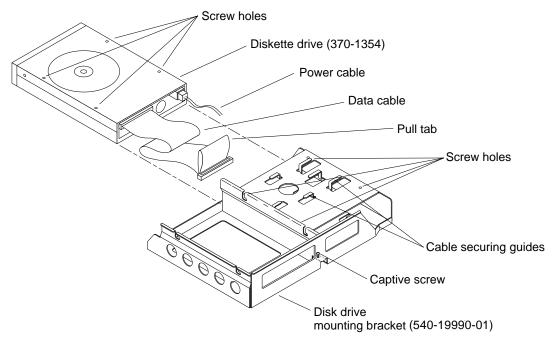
Exploded View of the Disk Drive Mounting Bracket
